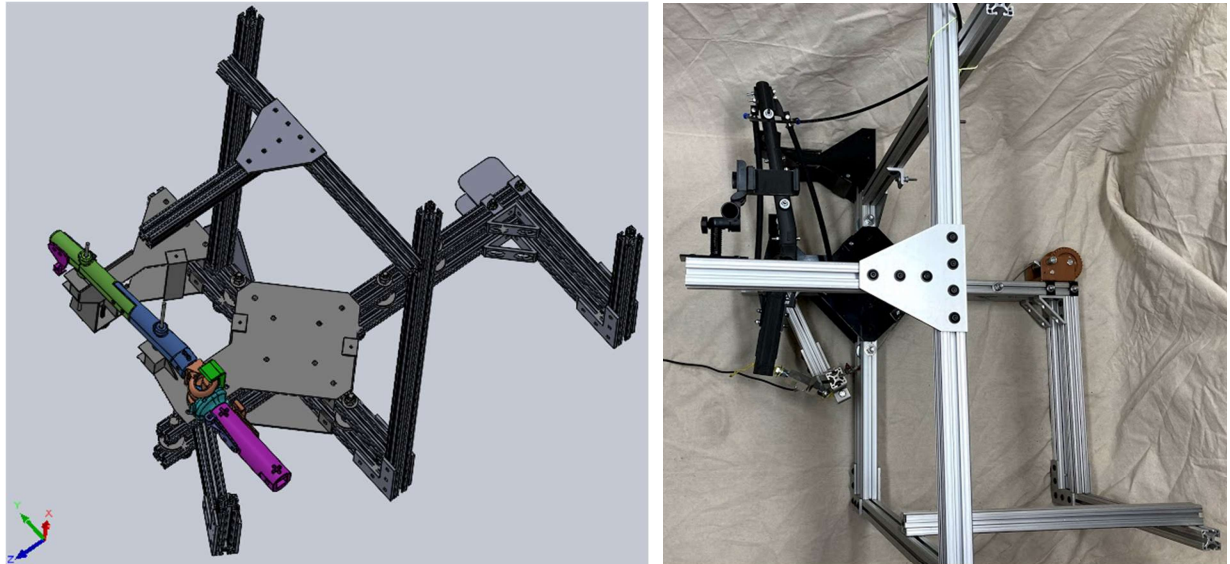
TEST JIG DESIGN FOR GATHERING THE TORQUE PROFILE PRODUCED BY PAMs ABOUT THE KNEE AXIS OF A BIOMIMETIC, HUMANOID, ROBOT LEG ASSEMBLY.
